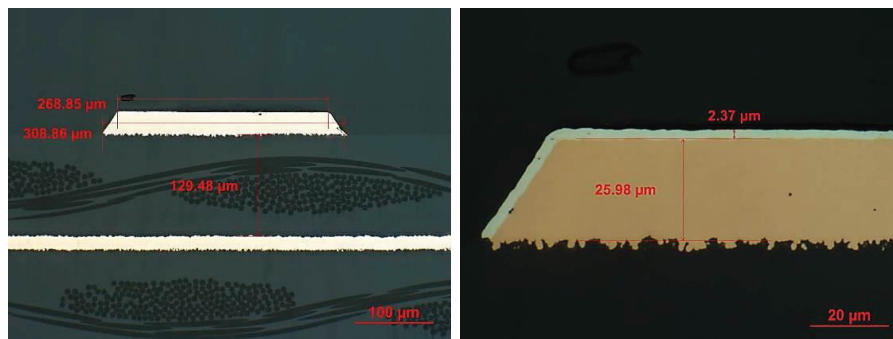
Cross-sections of the microstrip Beatty standard PCB test board (different PCB from the one used for the measurements).
